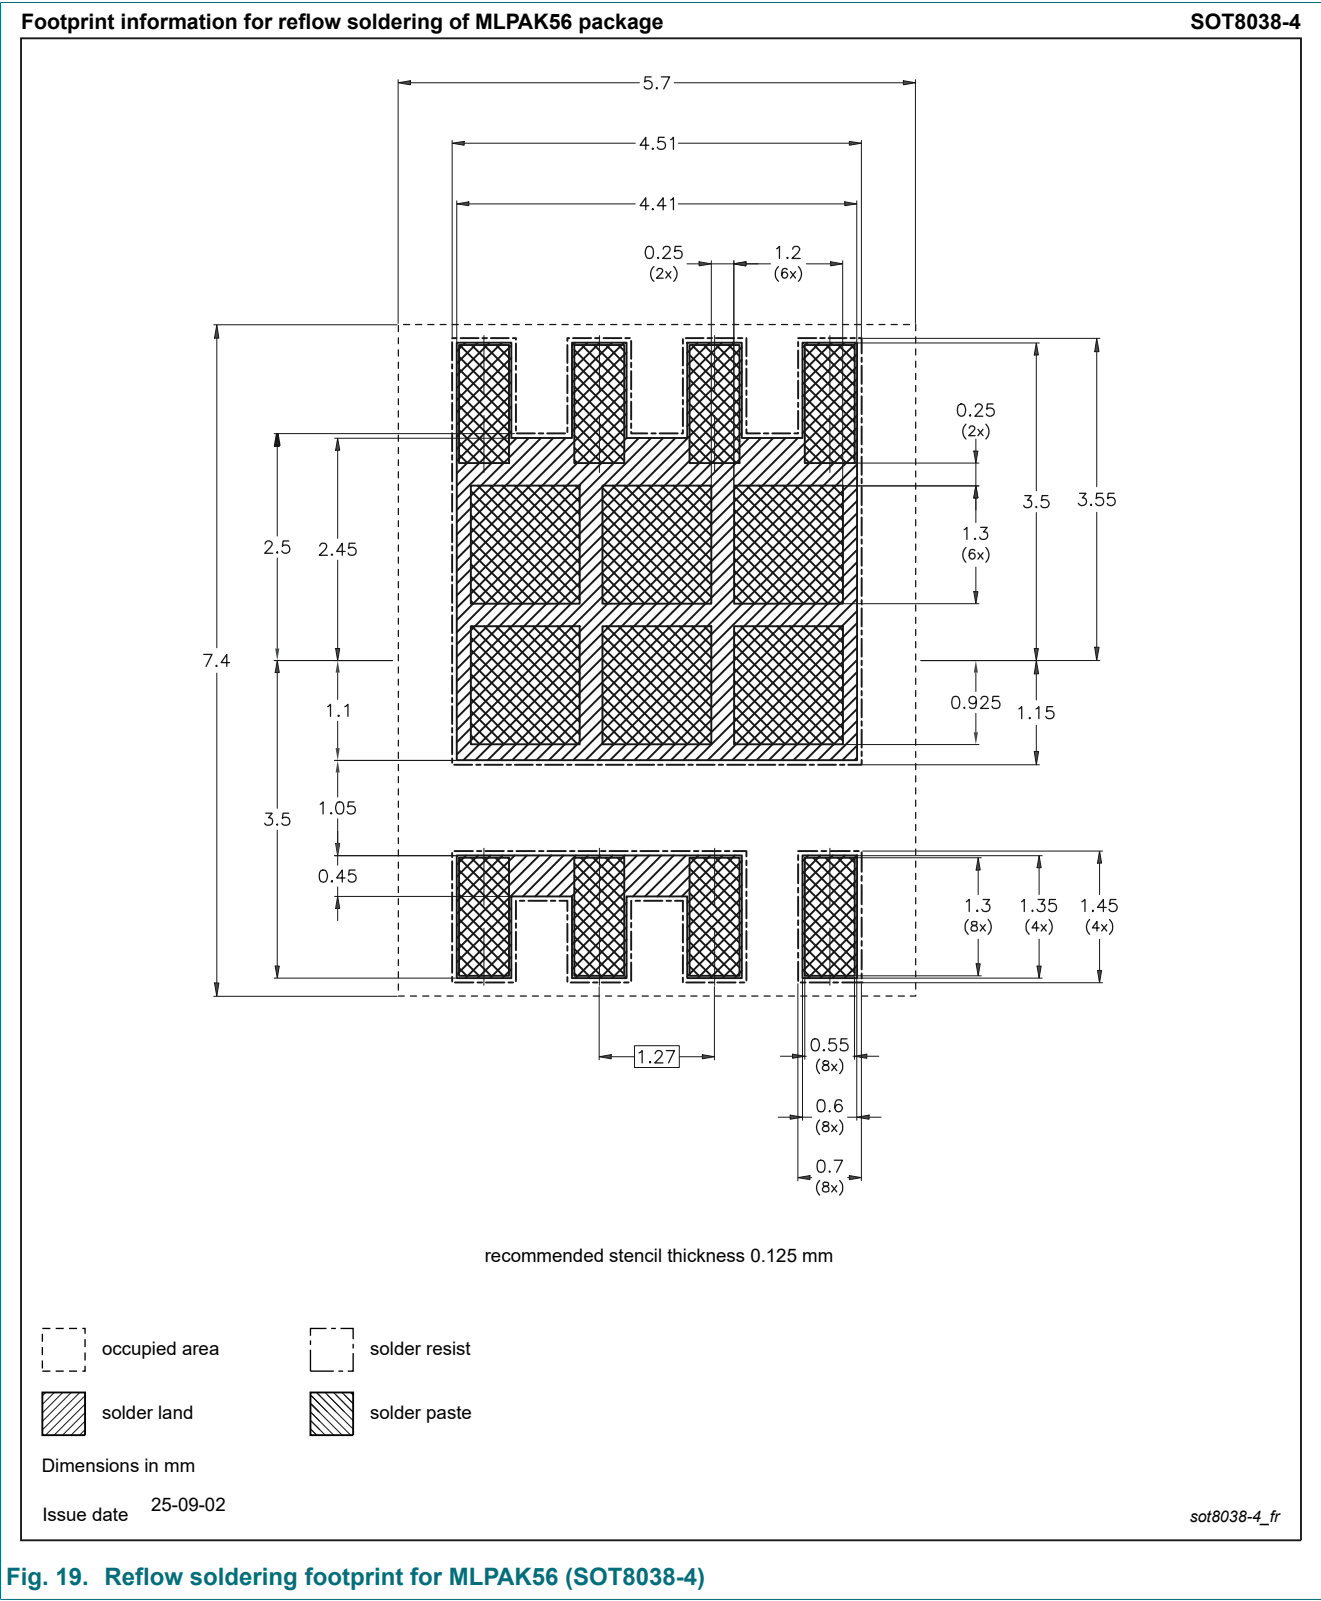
Reflow soldering footprint for MLPAK56 (SOT8038-4)
